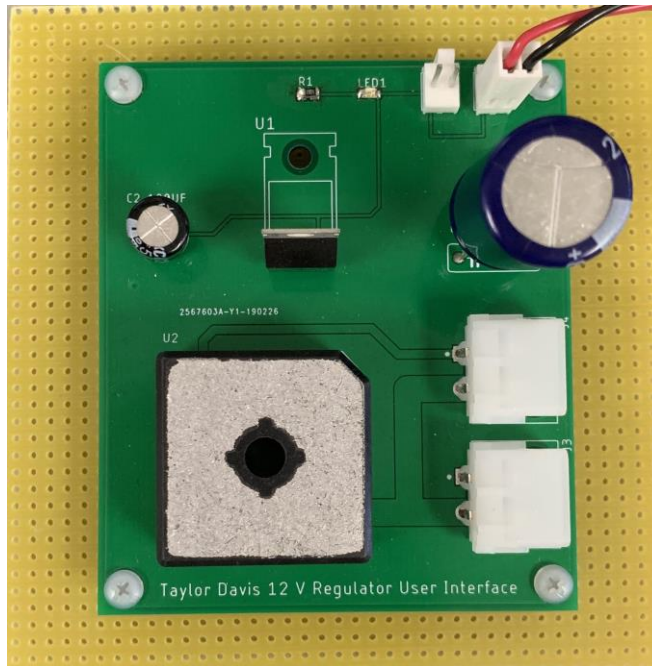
12V DC Rectifier & Regulator PCB Top View
